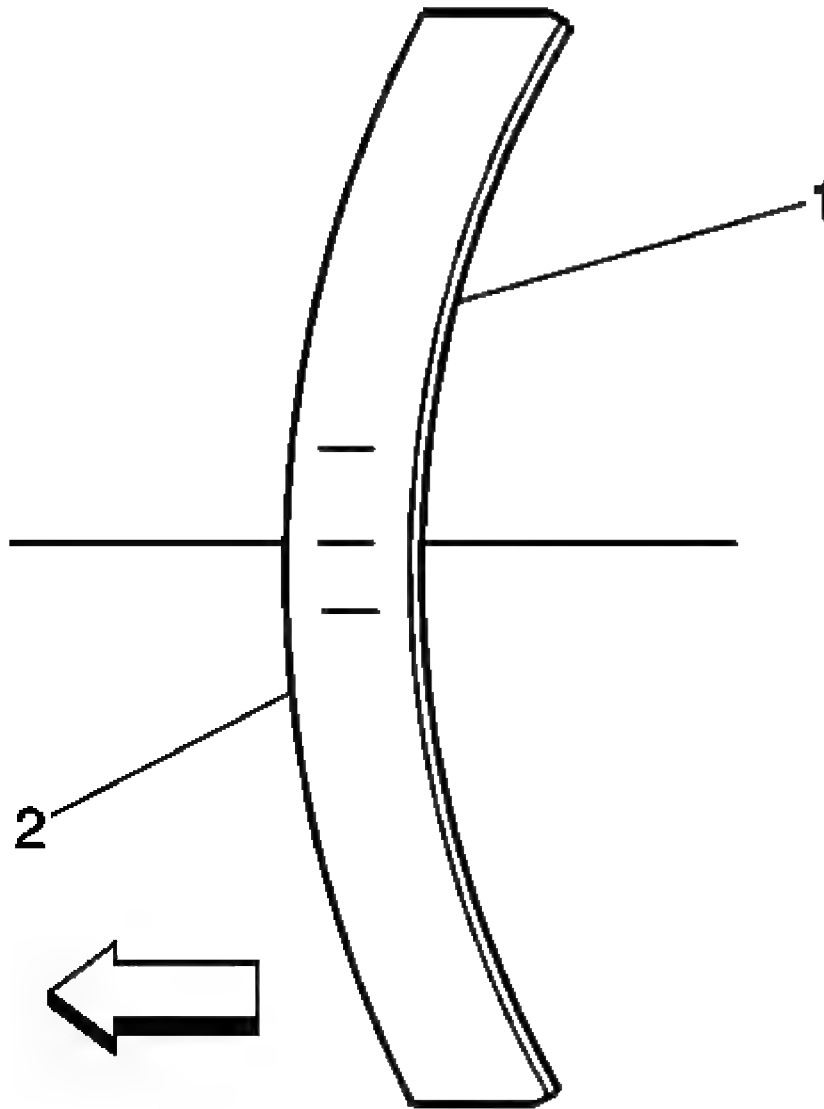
View Of Crown Of Crankshaft Balancer Washer
